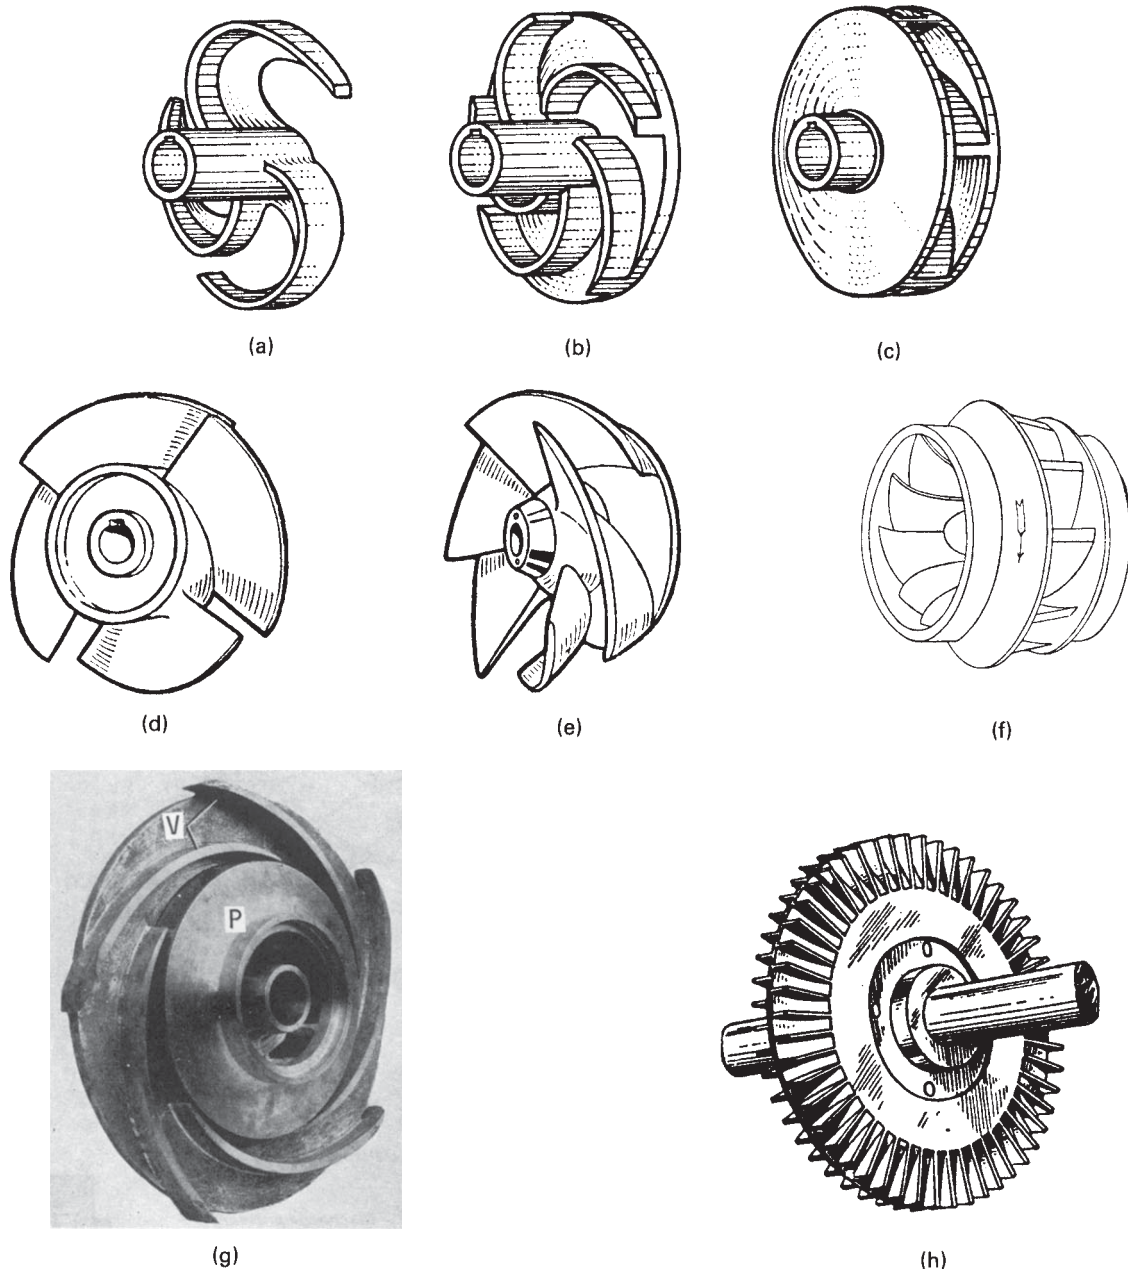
Some types of impellers for centrifugal pumps. (a) Open impeller. (b) Semiopen impeller. (c) Shrouded impeller. (d) Axial flow (propeller) type. (e) Combined axial and radial flow, open type. (f) Shrouded mixed-flow impeller. (g) Shrouded impeller (P) in a case with diffuser vanes (V). (h) Turbine impeller.
